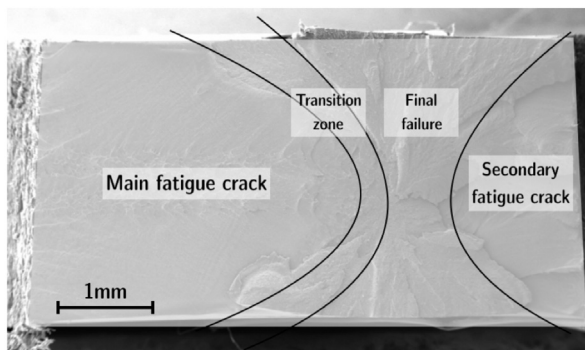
Fracture surface of a notched PA66 specimen after fatigue testing ($N_f = 917$).
